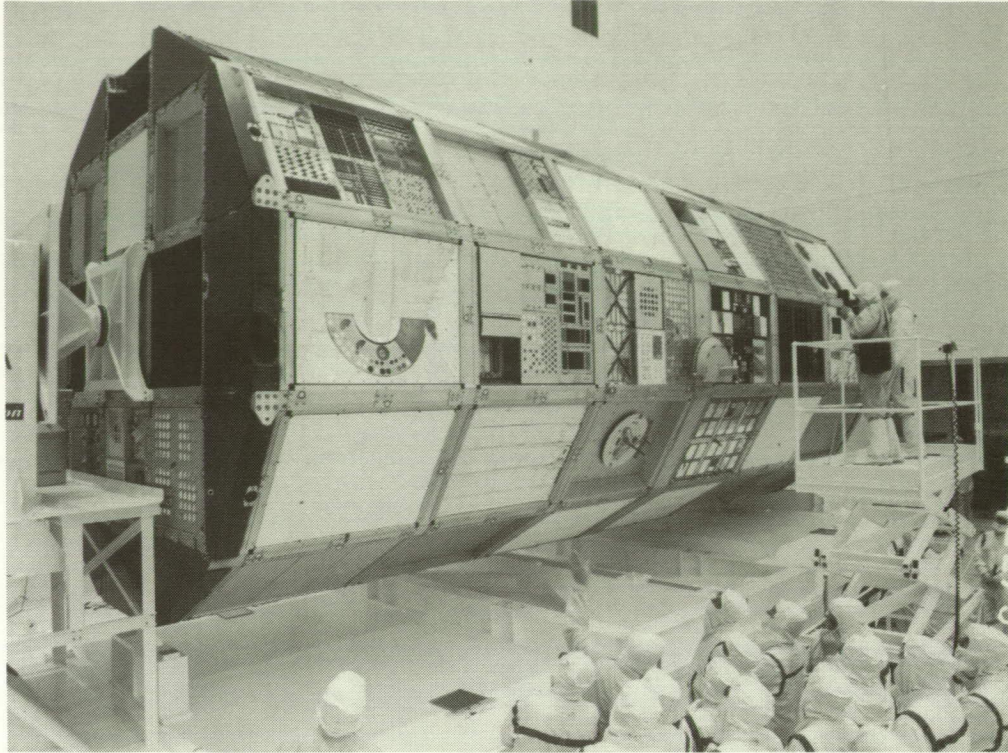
Personnel inspection LDEF. (Photo L-90-02273)
